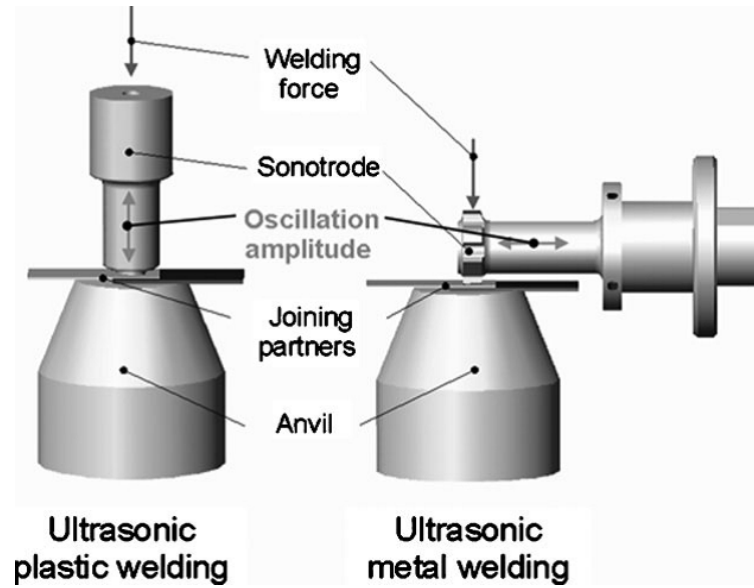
Orientation of ultrasonic metal and plastic welding [10].
